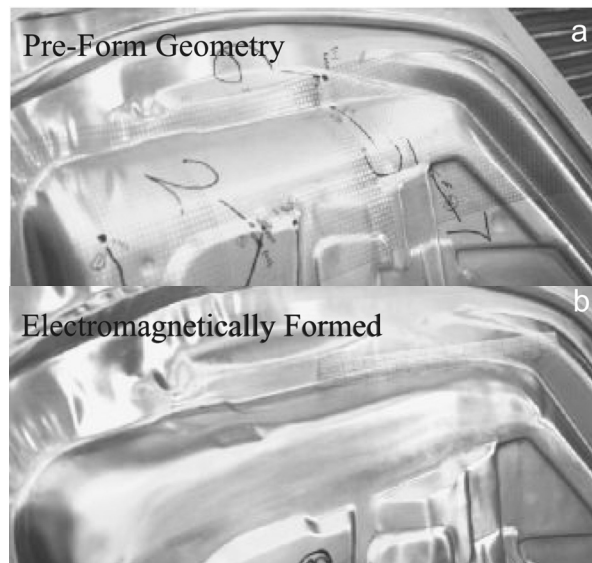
Example of pre-formed part (a) and formed to final shape using EM forming (b) [6]
